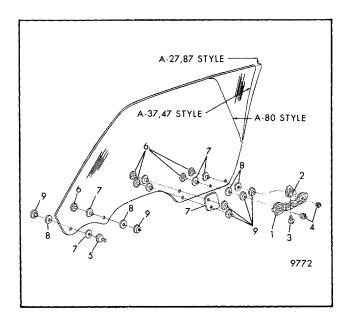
Front Door Window Assembly - A Coupe Styles
